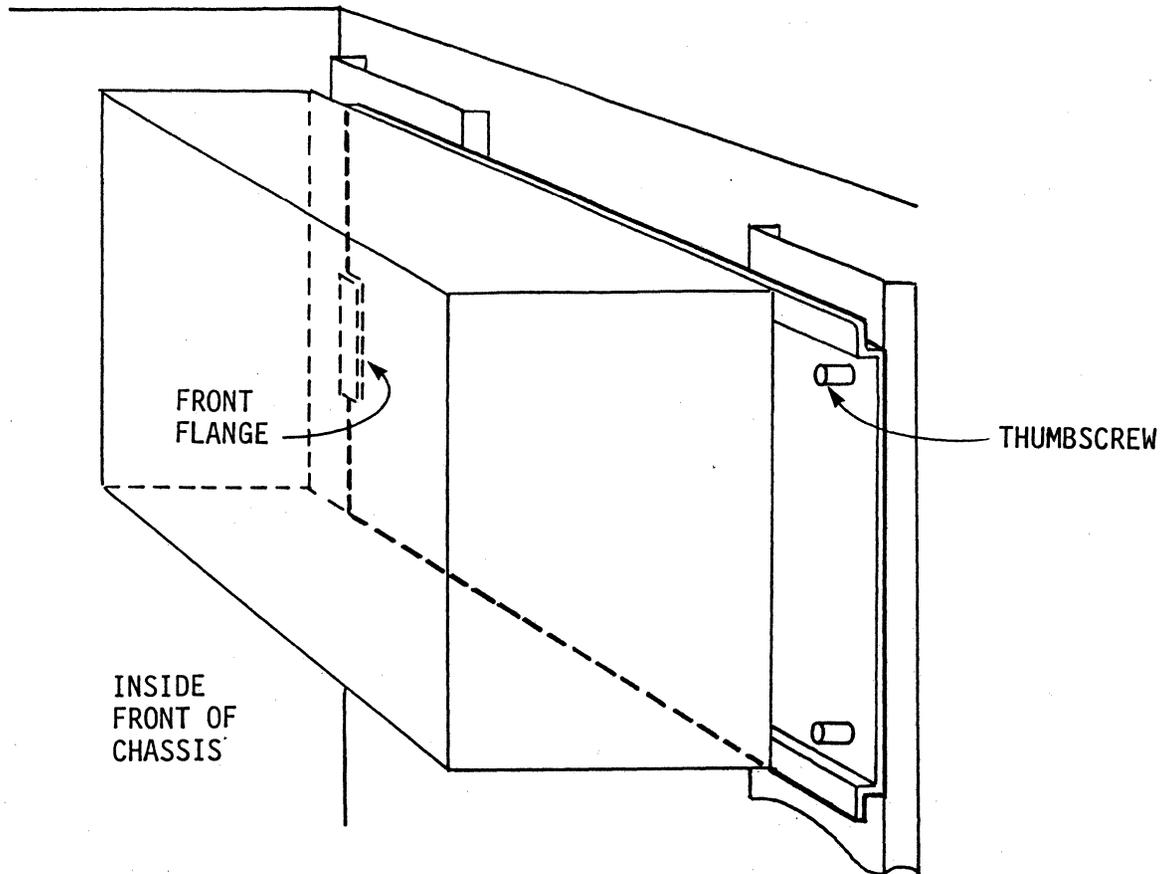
MOUNTING FLOPPY DRIVES INTO CHASSIS
